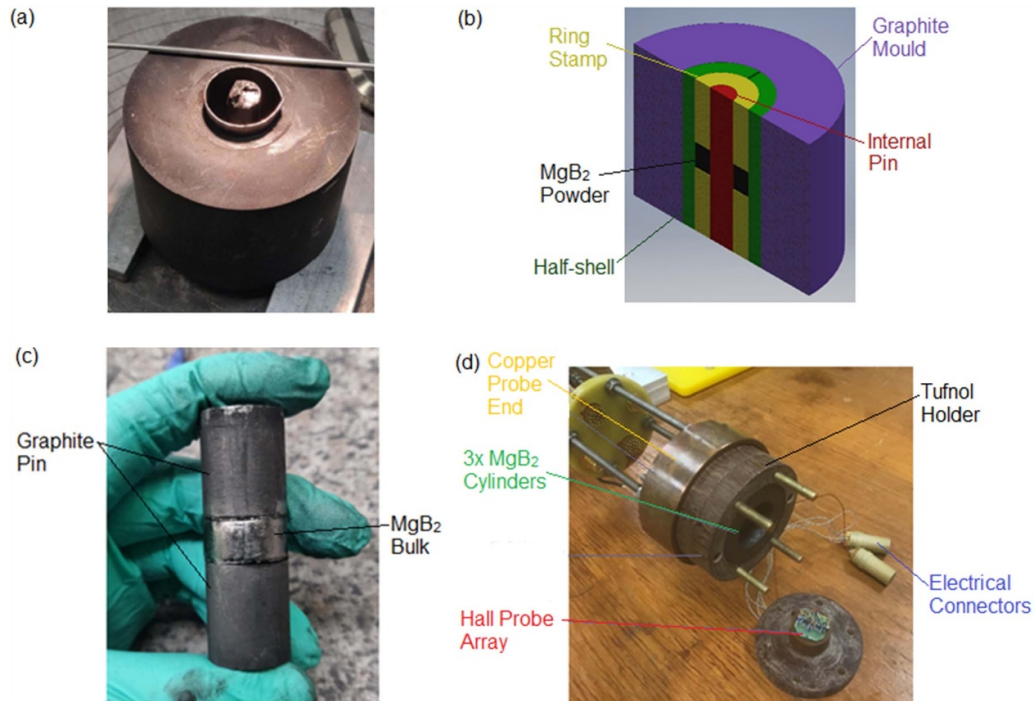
(a) Photograph of bespoke mould for ring manufacture. (b) Labelled cut-through schematic of mould. (c) Internal pin structure. (d) Labelled picture of ring holder.
